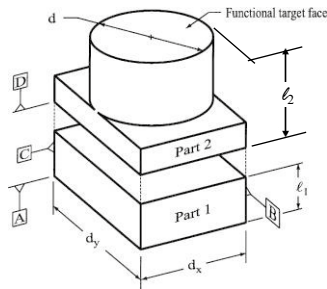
Assembly of two parts with dimensions l_1 and l_2 .
